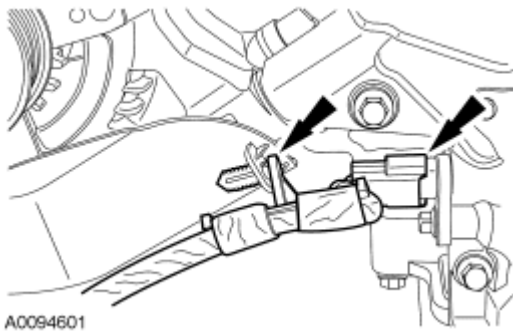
Locating Crankshaft Position Sensor (CKP) Electrical Connector & Wiring Retainers
